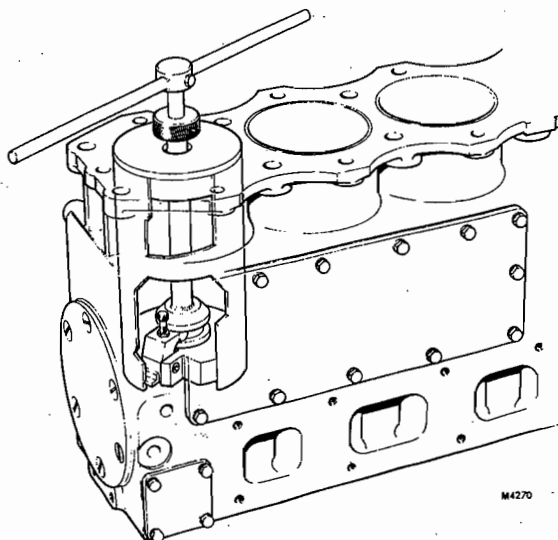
CUTTING ANNULAR GROOVE IN CYLINDER LINER
